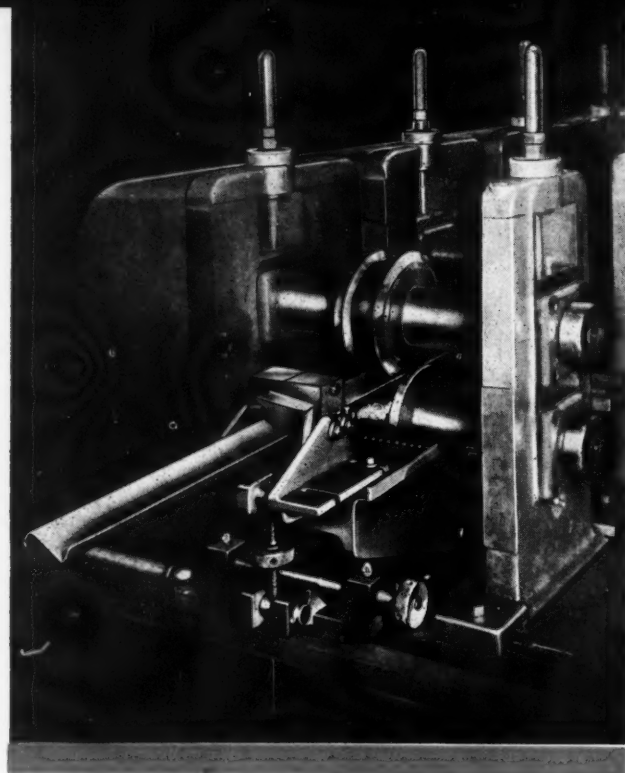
A Straightener is Attached to End of Roll-forming Machine to Counteract Curving or Twisting of Finished Section
